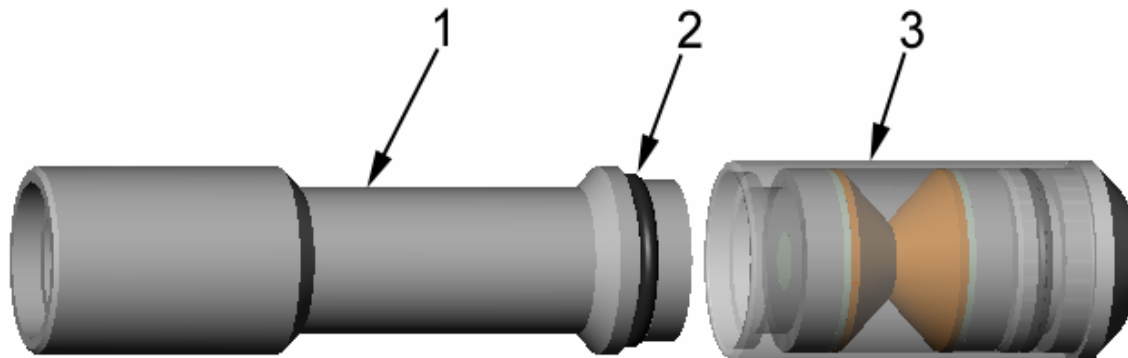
Exploded View, sizes 1.156-in - 1.460-in
